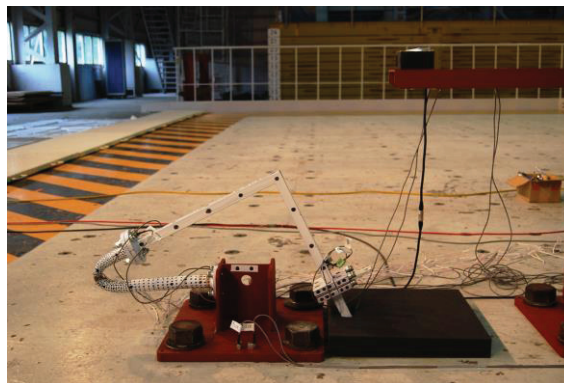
Ratchet-collapse failure mode of the lead elbow pipe
